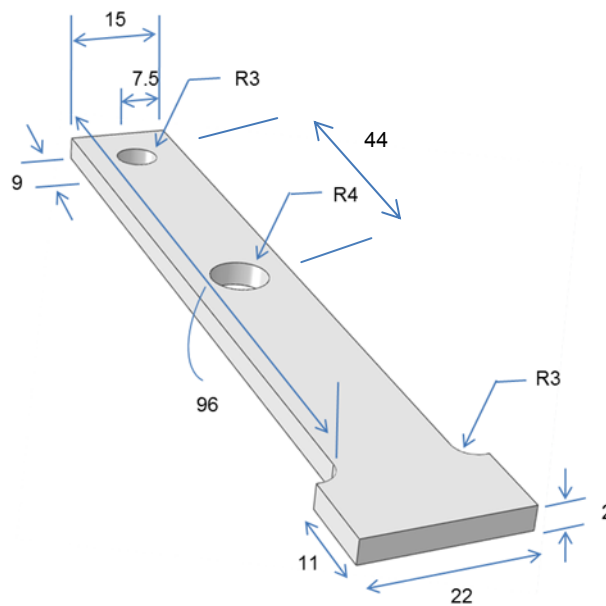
Schematic and dimensions of TIFT specimens, units in mm
